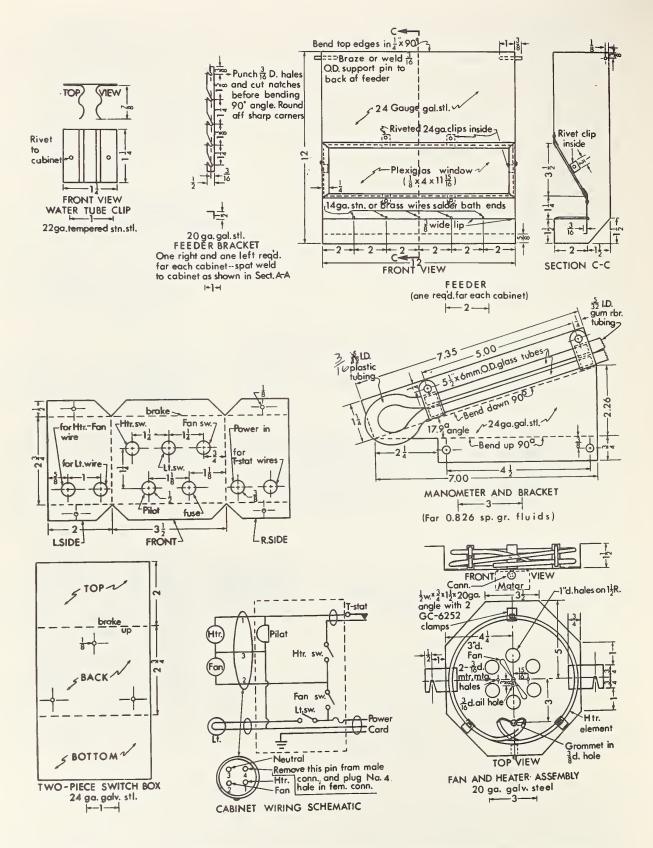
Drawings of feeder, manometer, fan and heater assembly, and other cabinet accessories.
